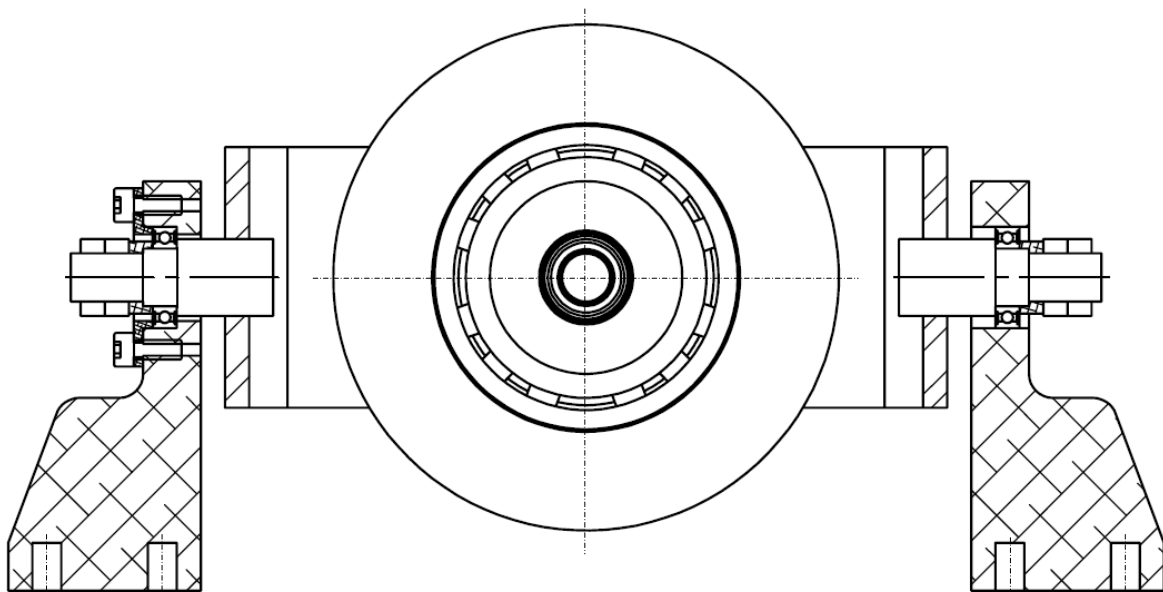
Section of gyroscope assembly showing bearing retention design
